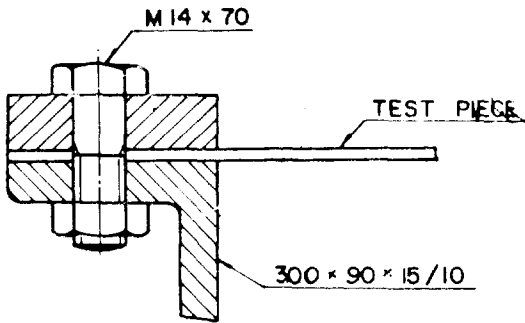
Details of fixed support for test pieces of (C-C, C-C) plates.
